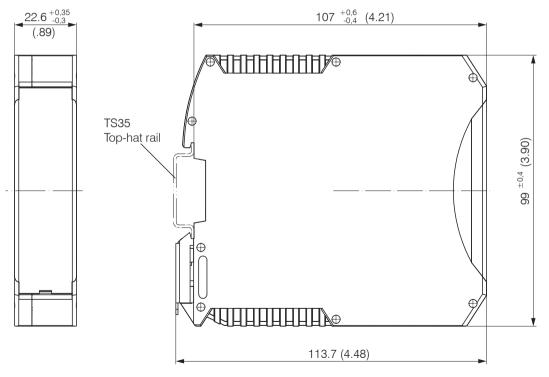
IF2030/ENETIP dimensional drawing, dimensions in mm (inches)
